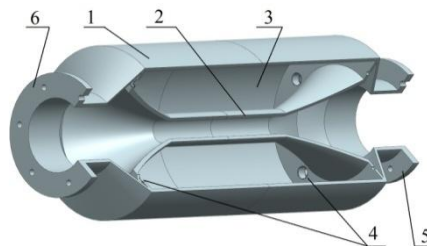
Schematic representation of the dampener. (1) Dampener housing assembly. (2) Constricted duct. (3) Non-flowing vessel. (4) Hydraulic throttles. (5), (6) Connecting flange.
